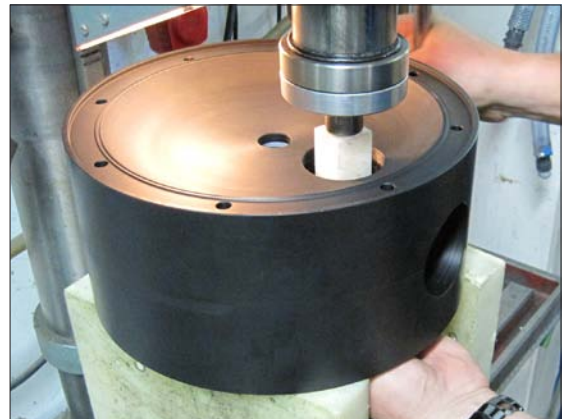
Carefully unscrew the air valve endcap by means of the mounting tool (282). Do the same with the endcap on the other side.
